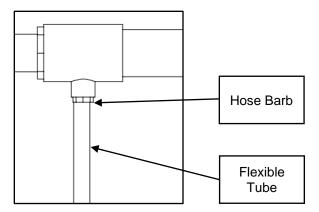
Removing Plug in Tee and Attaching Hose Barb/Flexible Tubing
